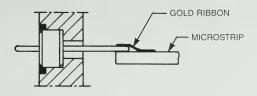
Figure B shows some of the more common methods of pin attachment: solder, gold ribbon bonding (commonly bonded by ultrasonic welding), and conductive epoxy. Mechanical pressure is sometimes used to hold the pin in contact with the line; this eliminates heating the circuit during attachment. New methods are being developed; one manufacturer uses a novel and proprietary process that lifts the microstrip line off the substrate and bonds it to the top of the pin.
